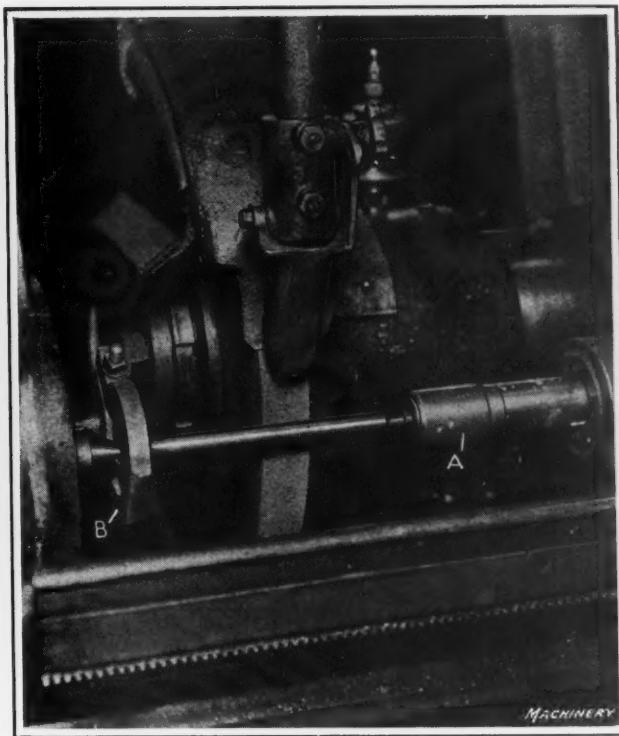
Special Grinding Machine Center used for holding Tractor Engine Valves for grinding their Stems
